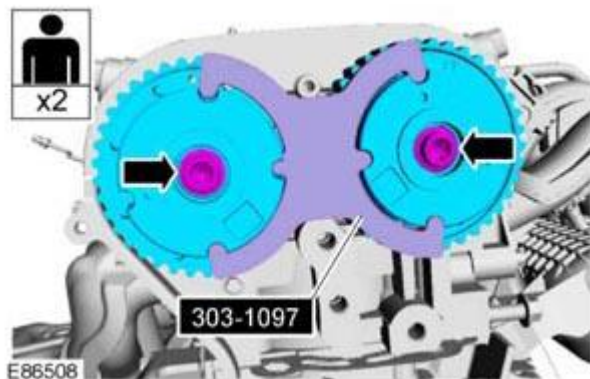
Locating Camshaft Phaser And Sprockets Bolts
